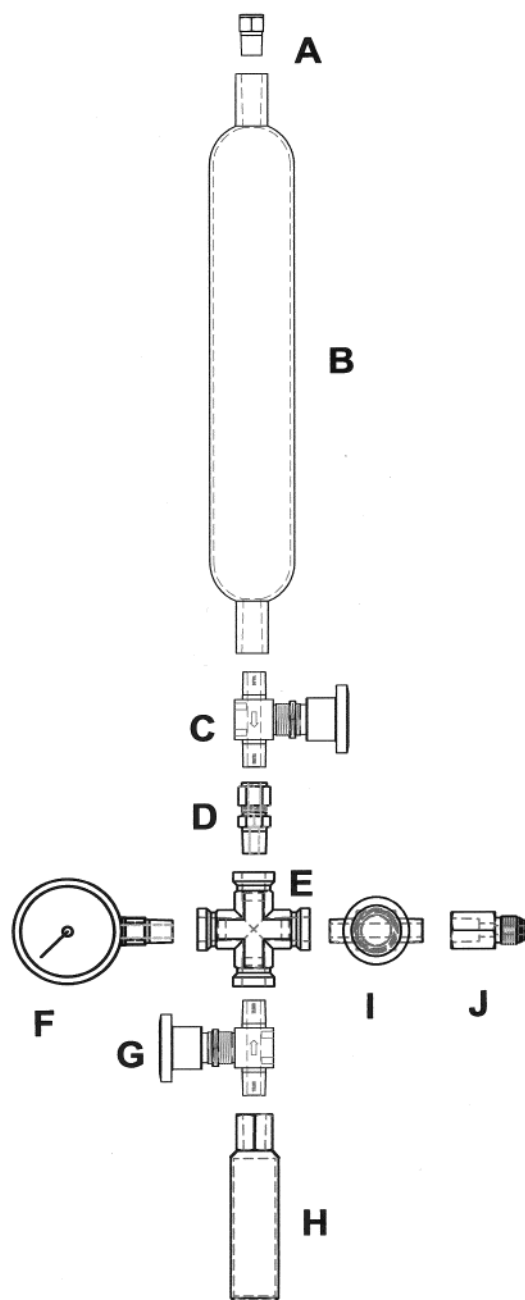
Exploded view drawing of the jet expansion module and sample cylinder. Module components are labeled as follows: (A) 0.25-in. NPT plug; (B) 0.5-L steel sample cylinder with 0.25-in. NPT ports; (C) sample cylinder diaphragm valve with 0.25-in. NPT ports; (D) 0.25-in. NPT fitting equipped with 0.010-in. jet orifice (in practice the jet subassembly can be fabricated using various component combinations); (E) 0.25-in. NPT cross; (F) pressure–vacuum gauge with steel Bourdon tube and 0.25-in. NPT port; (G) expansion cylinder bellows valve with 0.25-in. NPT ports; (H) expansion cylinder with 0.25-in. NPT port; (I) interfacial bellows valve; (J) adapter 0.25-in. NPT to VCR (also connected to GC-injection manifold).
